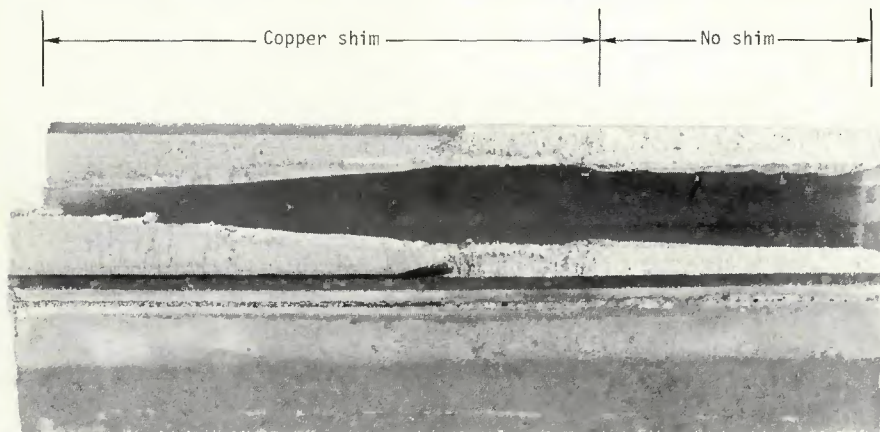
Broken surfaces on an electron beam step-joint weld in a plate of D-38. The right hand portion had no shim, while the remainder contained a copper shim 0.08 mm thick. Note change in fracture path because of the shim
